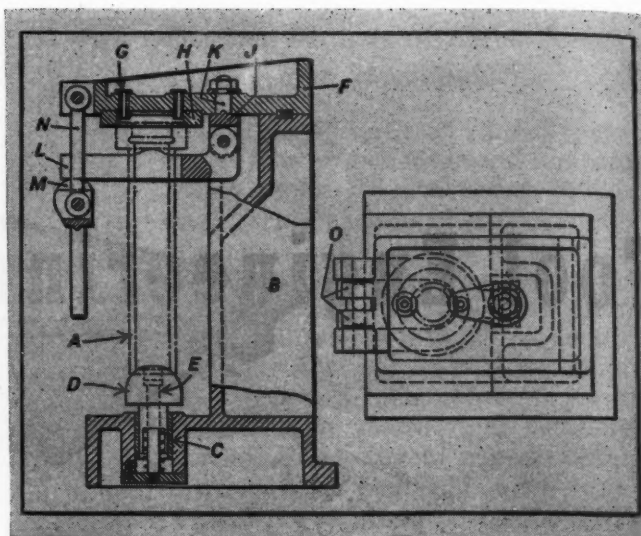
Meshing Gear Method of Positioning Gear-box for Boring Shaft Holes
